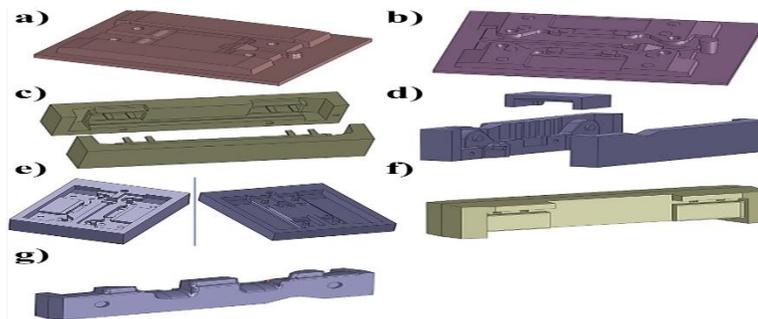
a) bottom plate; b) top plate; c) large core box; d) small core box; e) casting mold halves; f) large core; g) small core
